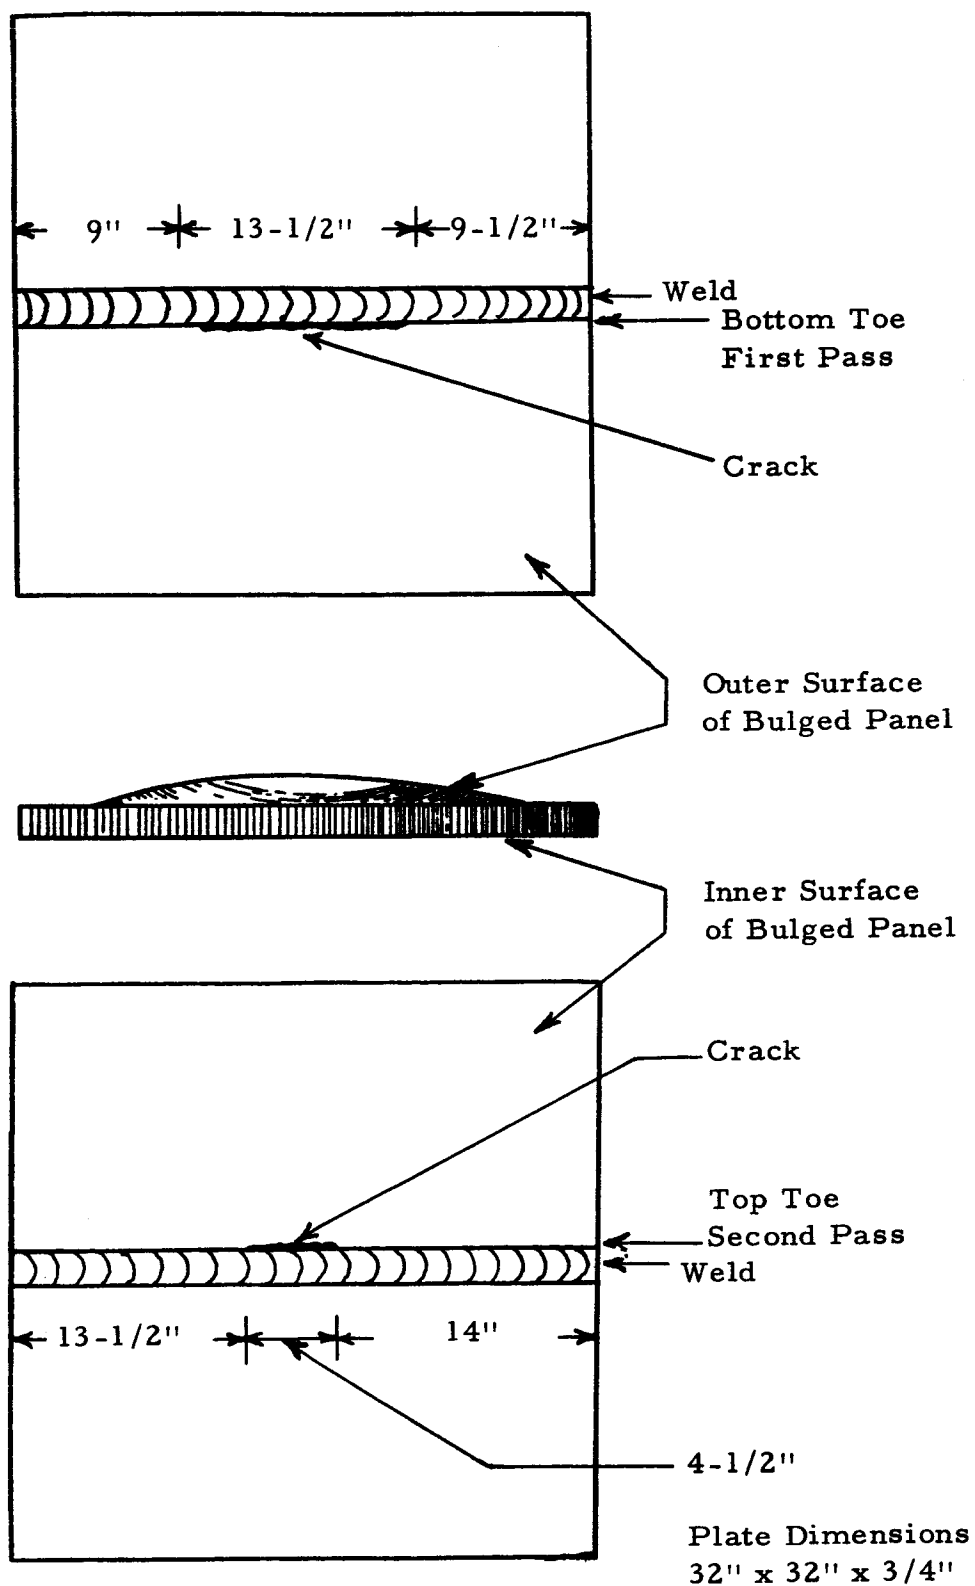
LOCATION AND MEASUREMENTS OF SURFACE CRACKS IN SINGLE BUTT WELD PANEL NO. 41 AFTER HYDRAULIC BULGE TEST
